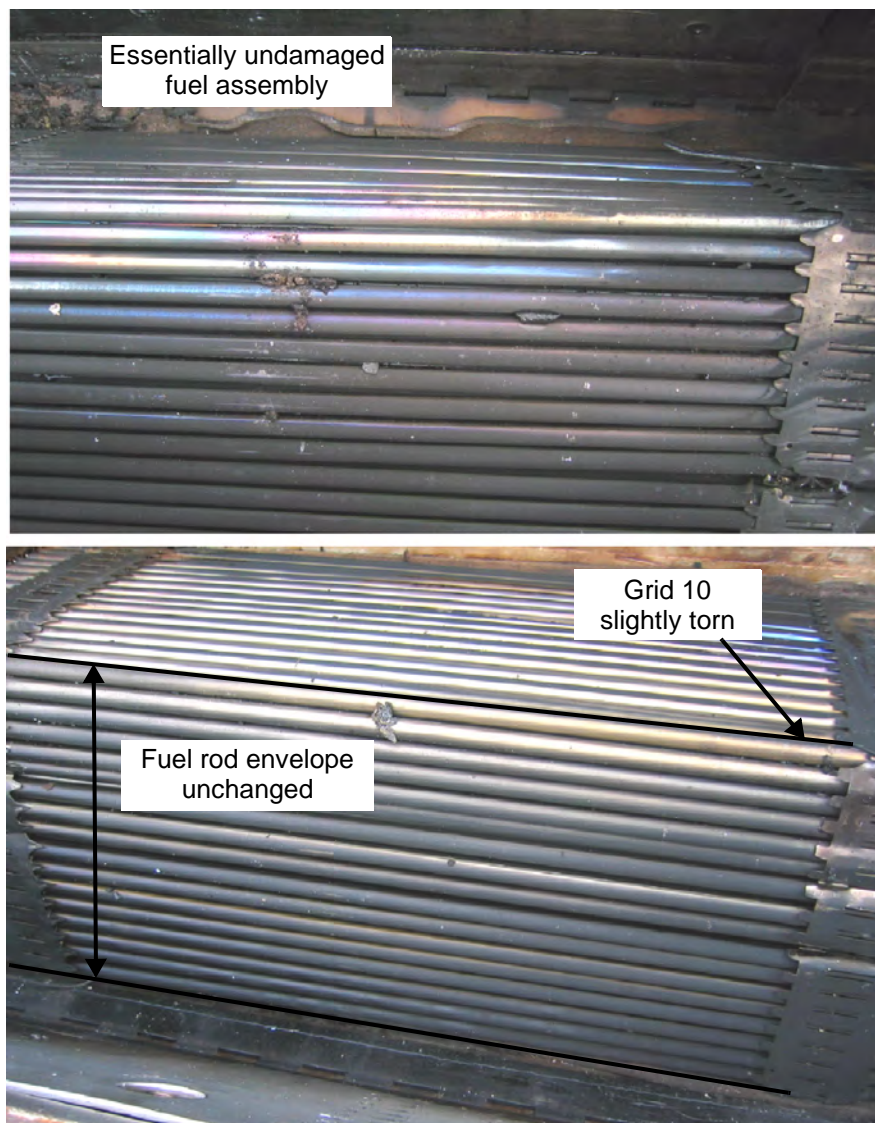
QTU-1 Fuel Assembly After Drop and Burn Tests
